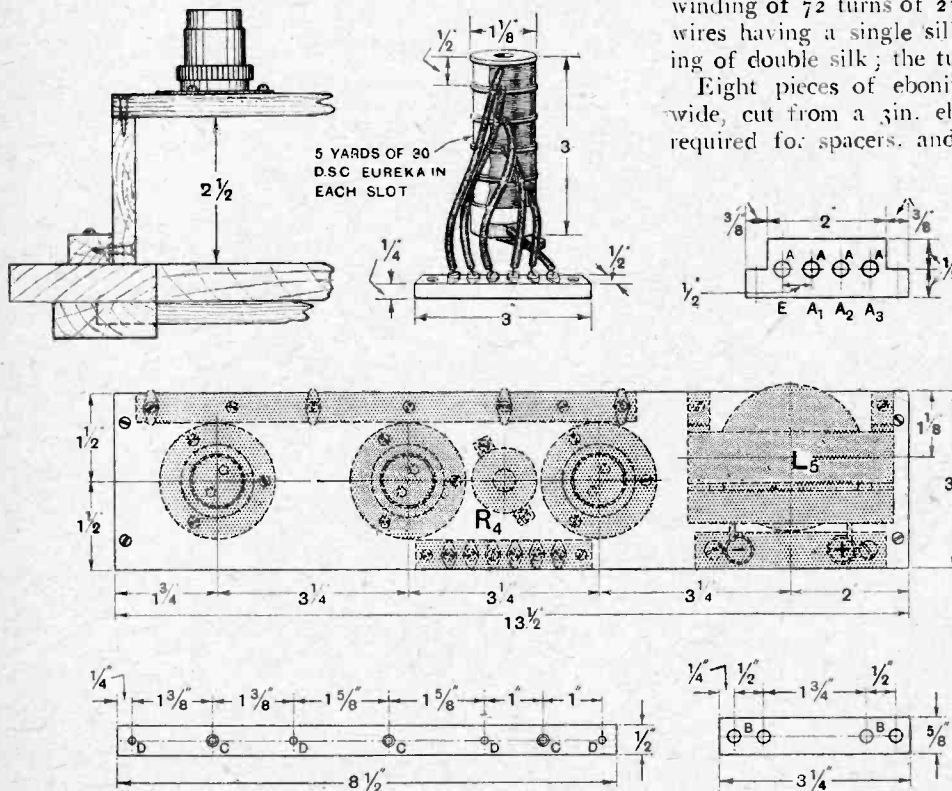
Constructional details of the lamp platform; adjustable resistance and connection strip; aerial connection strip. Drilling details: A, 9/32in. dia.; B, 7/32in. dia.; C, 1/4in. dia. countersunk for No. 4 wood screws; D, drilled and tapped for 6 B.A. screws.
